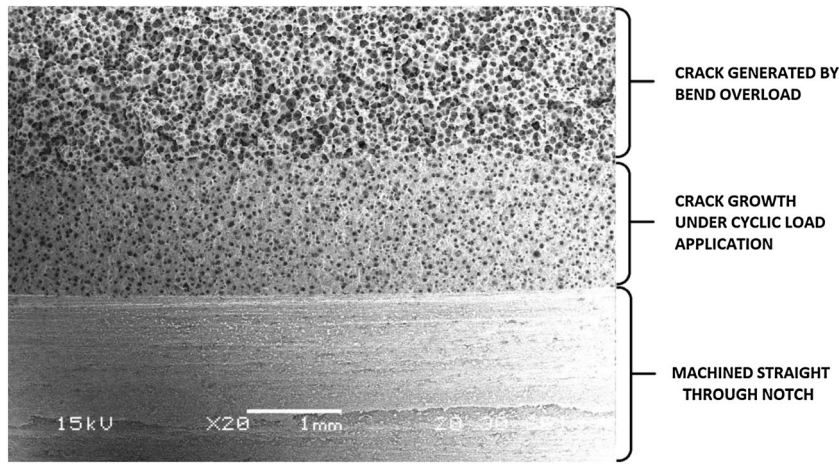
Fracture surface of SEN(B) sample showing the machined notch, cyclic load growth crack and overload zones.
